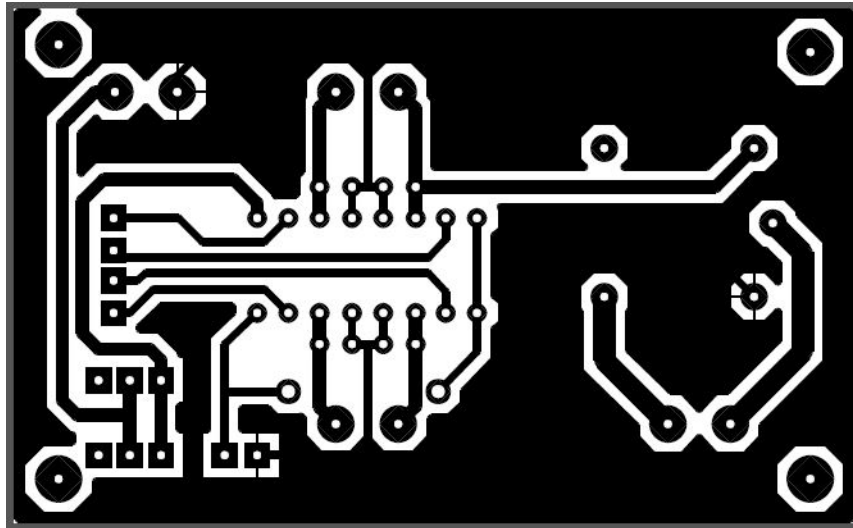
PCB Diagram of Motor Driver and Relay (Bottom Layer)
